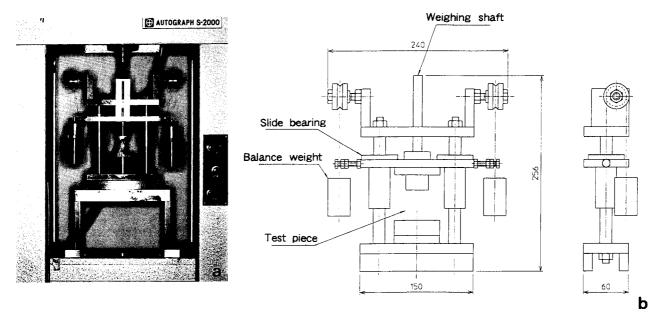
Experimental study on fracture. a: Fracture with the fixator and the loading machine, b: Design of the fixator.
